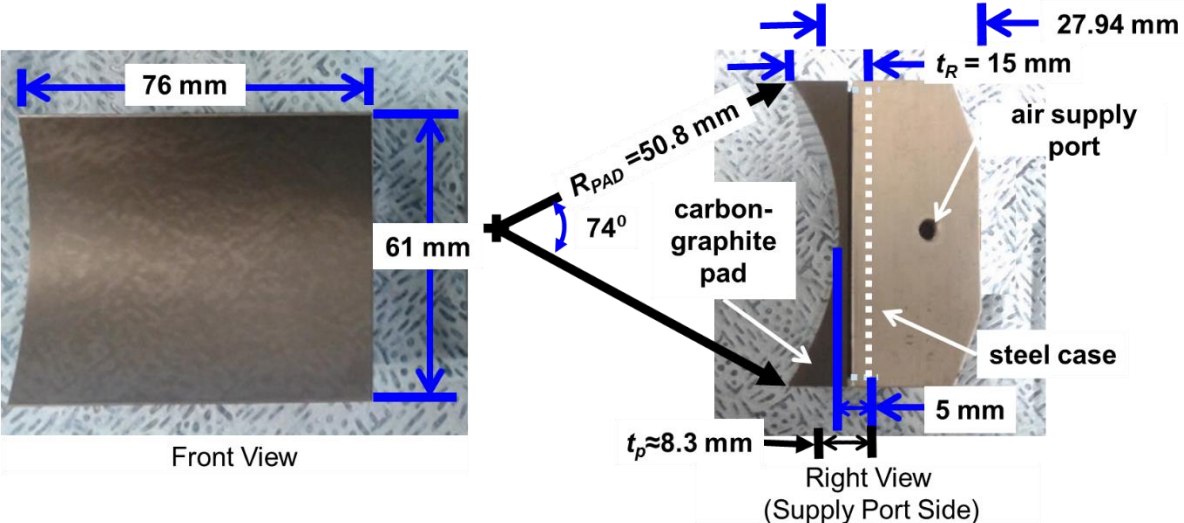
Photographs of a bearing pad (top and side views) with physical dimensions.
